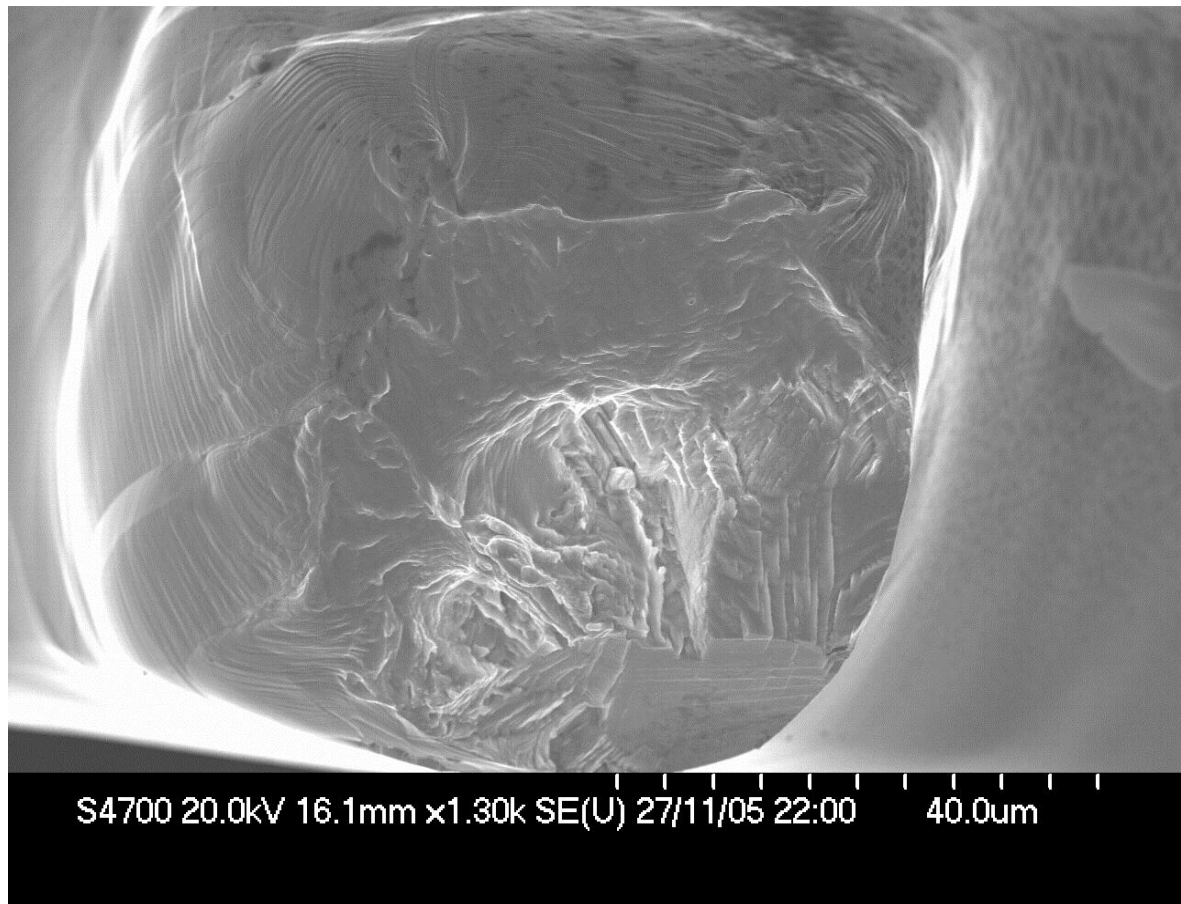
CII_01_75_B. Fatigue and ductile. 75 μm specimen.
